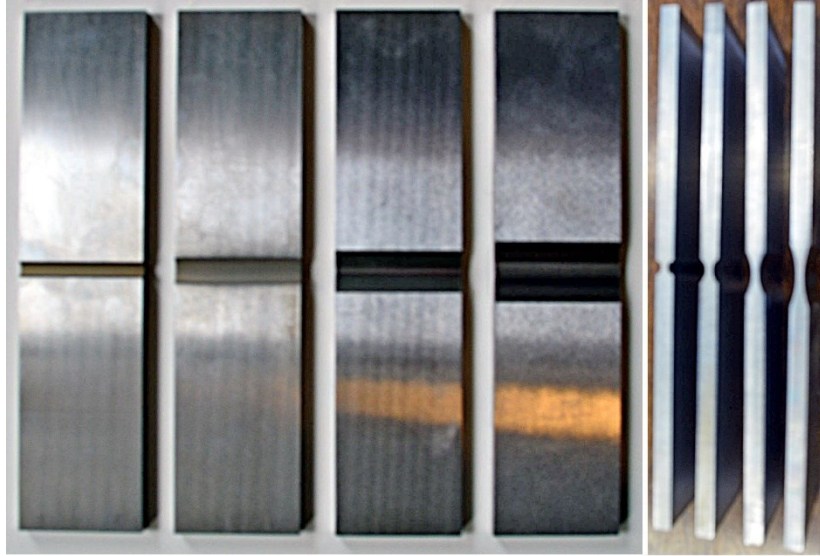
Picture of GP specimens machined out of the pipe wall
